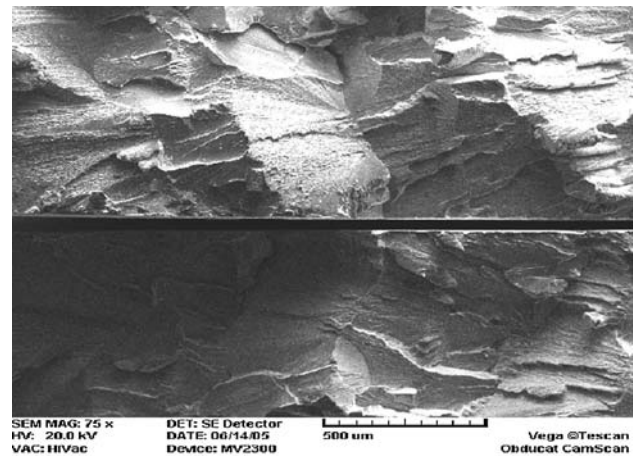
Fracture surface of the tensile test specimen taken from the weld No. 5 exhibiting river pattern initiating from gas porosities
